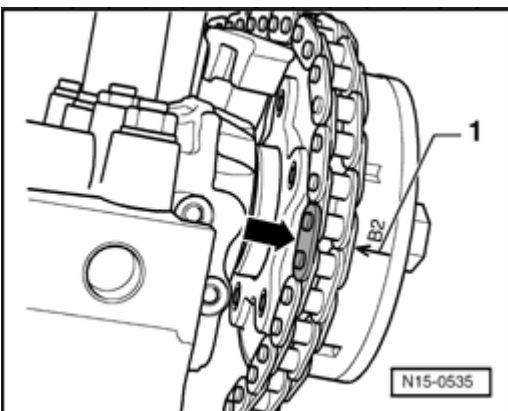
Copper-Colored Chain Link Aligned With Marking On Exhaust Camshaft Adjuster
